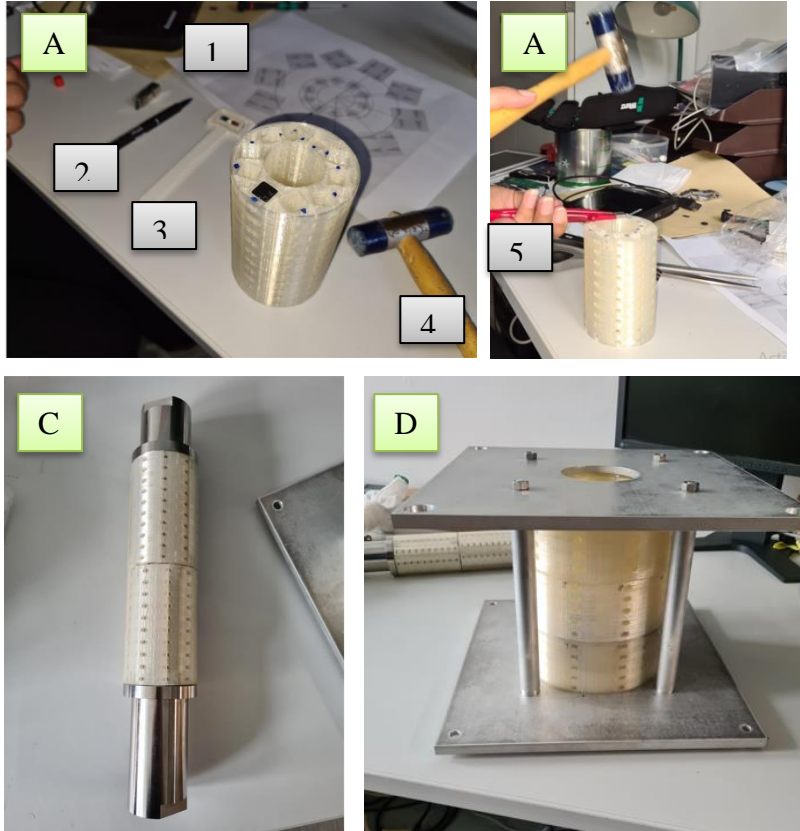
Manufacturing Process of our final Mandhala, (A): magnet manufacturing tools, (1): Magnet design, (2): Marker pen, (3): compass, (4): Hammer and (5): pliers, (B): The process of inserting cubic magnets pieces into the Mandhala using the hammer (C): Our Final Manufactured Inner Mandhala cylinder (C): The Final Manufactured Outer Mandhala cylinder.
